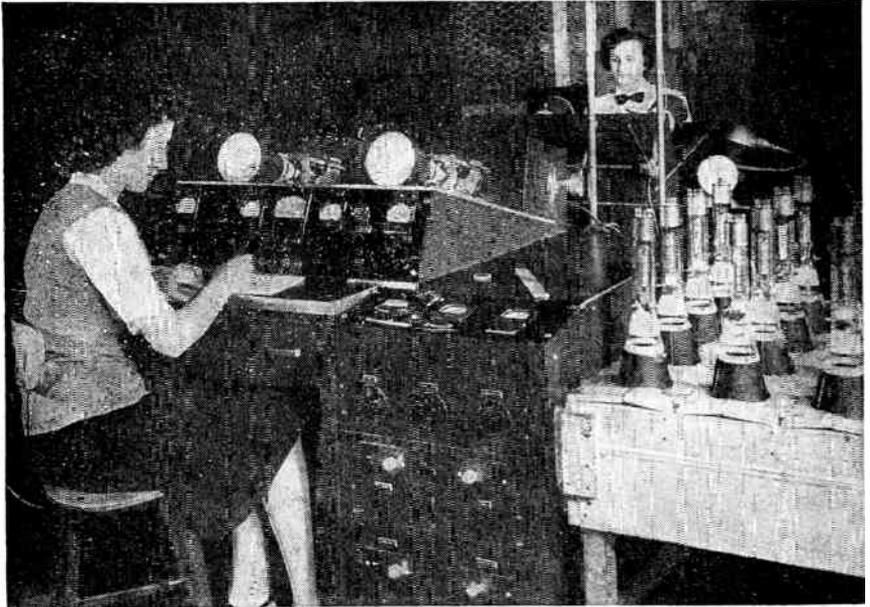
Typical test console. The Du Mont cathode-ray tube must pass 18 electrical and 12 mechanical tests after manufacture. (Courtesy of Allen B. Du Mont Labs., Inc.)
